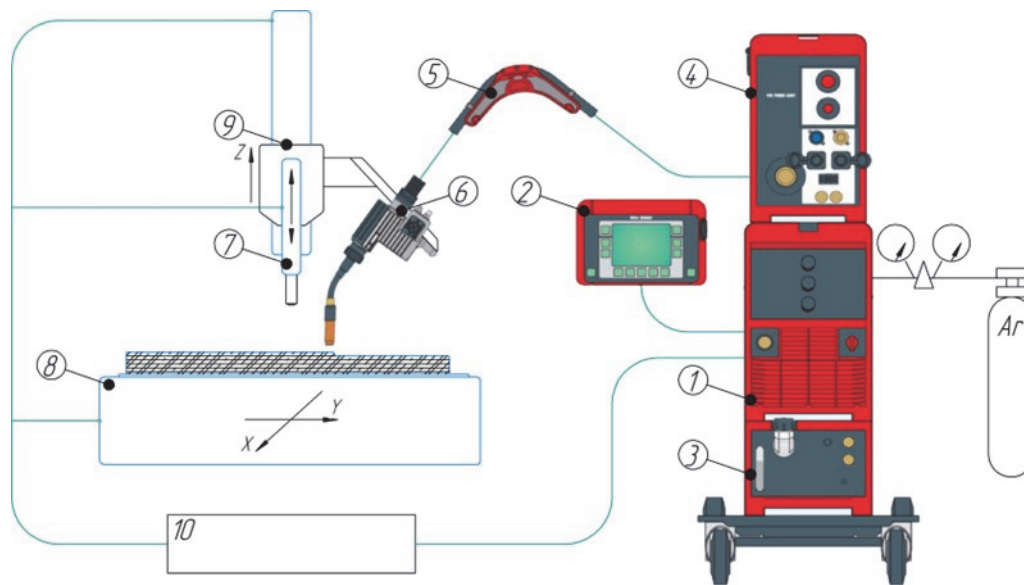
Technological process diagram. (1 – welding power source, 2 – control panel, 3 – chiller, 4 – wire feed unit, 5 – wire buffer, 6 – welding torch, 7 – pneumatic hammer, 8 – substrate, 9 – pneumatic-tool holder, 10 – CNC control system).
